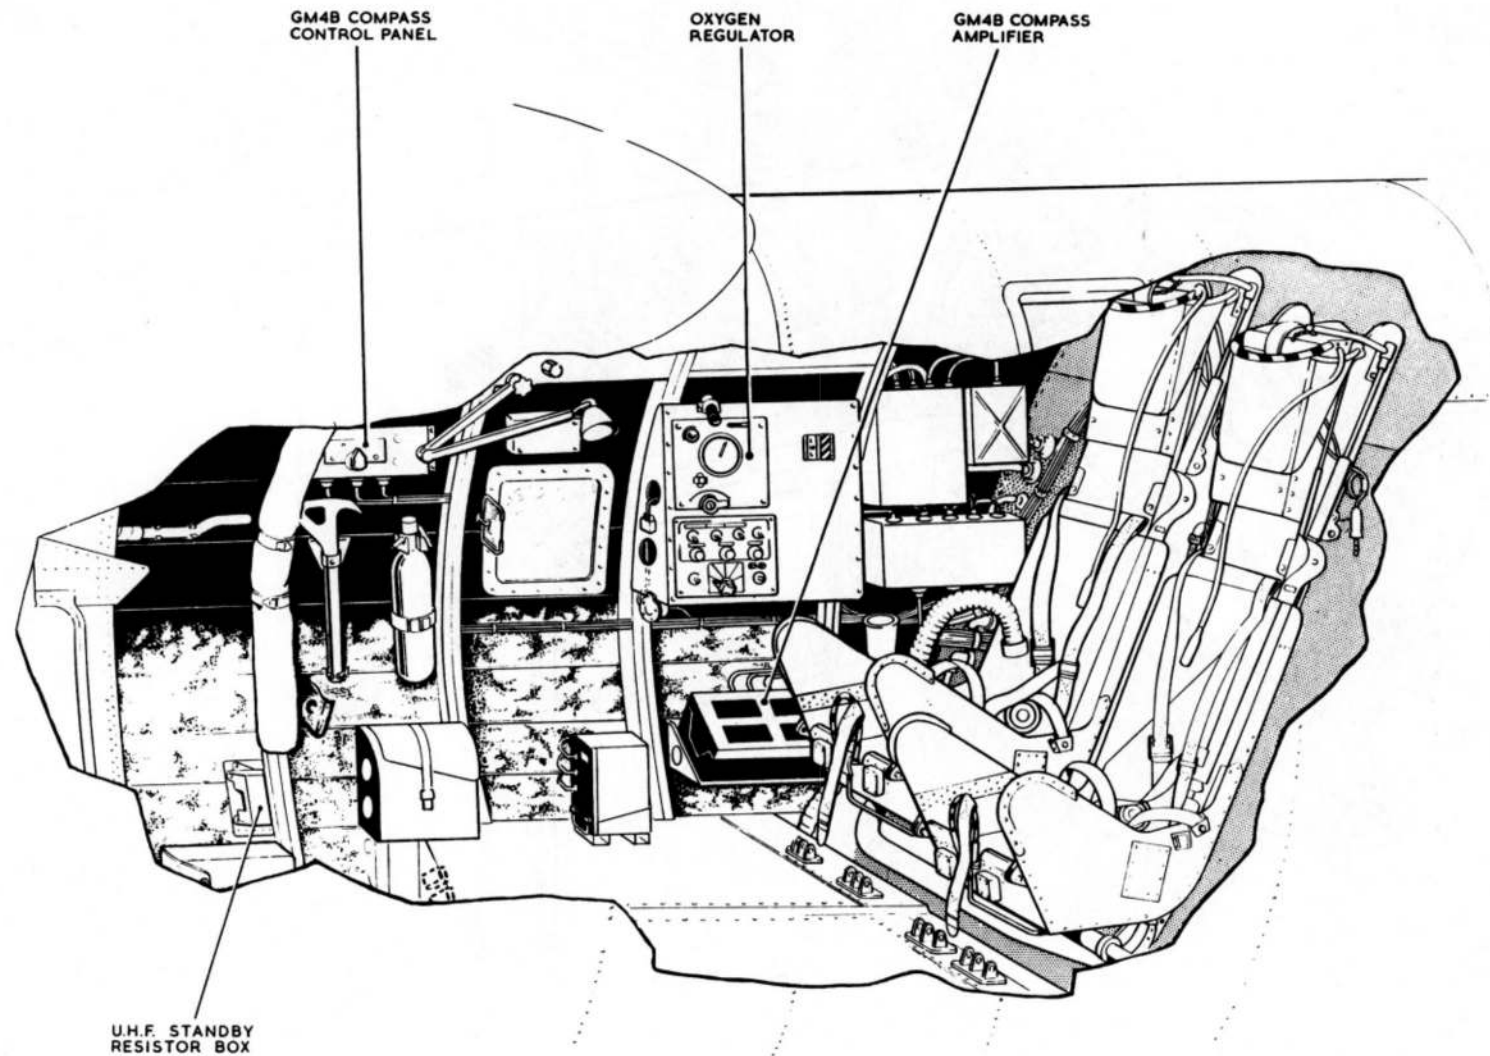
INSTRUMENT INSTALLATION - PASSENGER'S STATION
